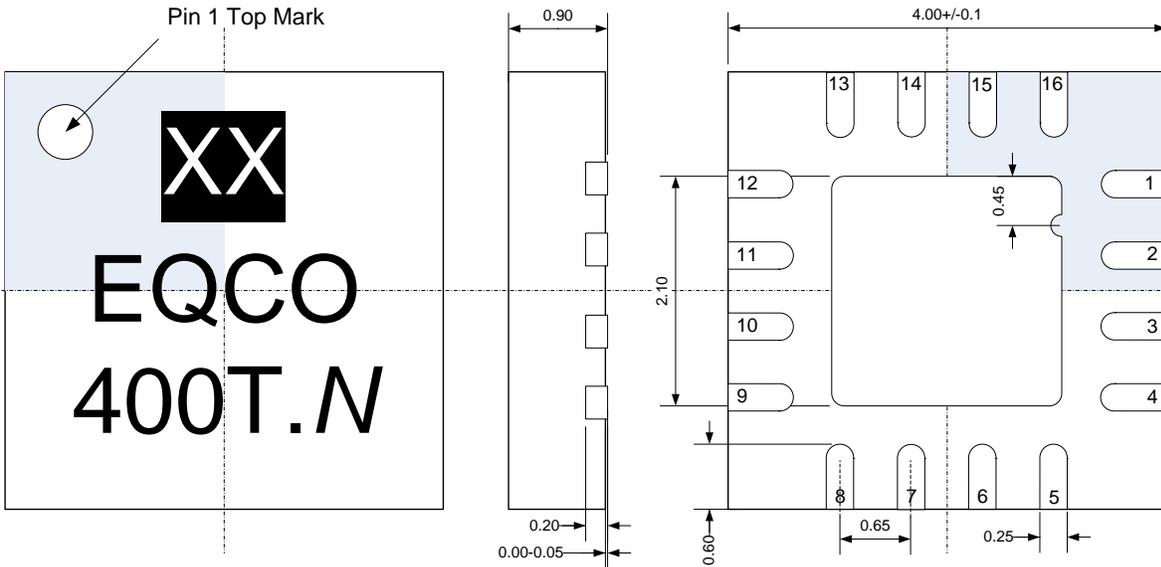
Package Drawing viewed from Top - Side - Bottom⁴
